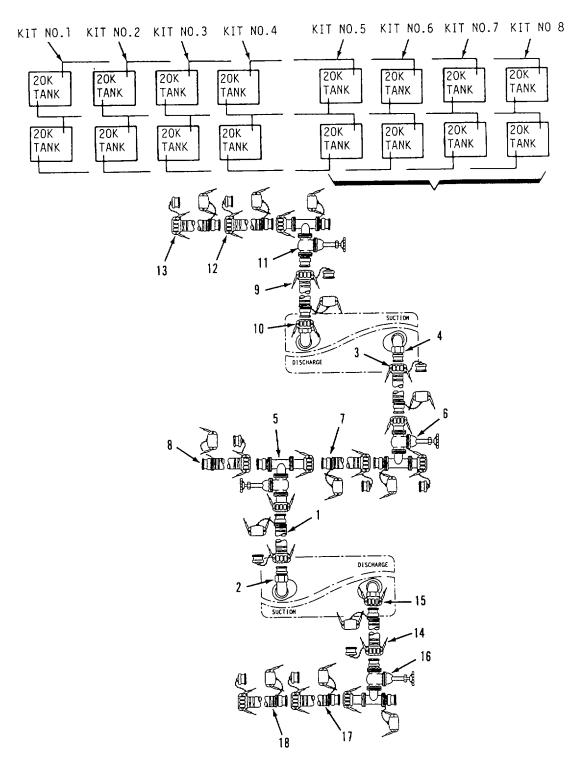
Dual Tank Connection Kit Assembly (sheet 2 of 2)
